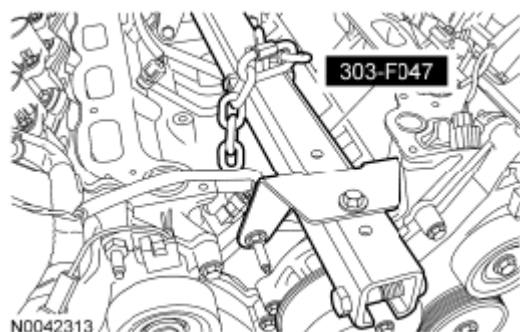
Installing Modular Engine Lift Bracket (303-F047)
